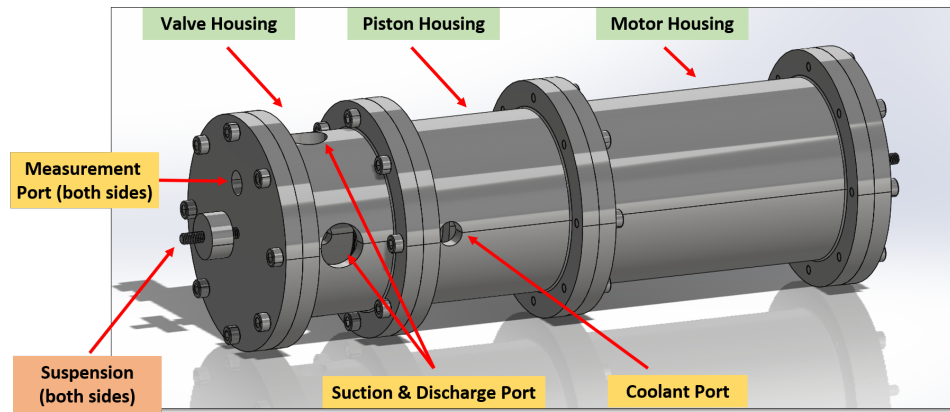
Schematic drawing of the final linear compressor prototype design (overview).
